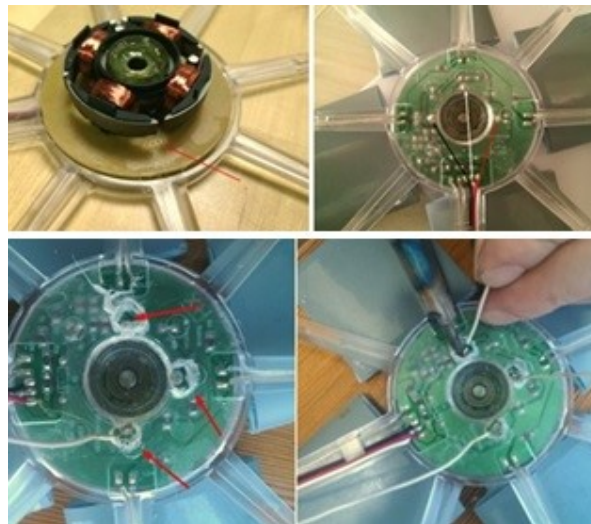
a) Copper wire windings and detached IC pin, b) Connection points of copper wires at the back of the fan, c) Drilling holes in the cover section, d) Soldering copper cables to copper windings.
